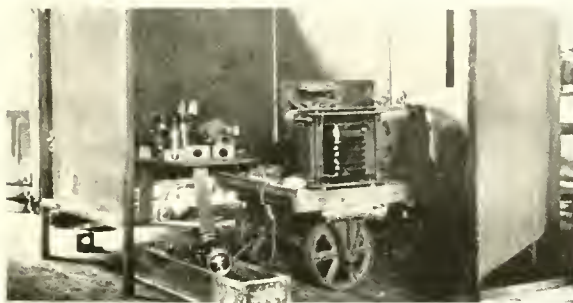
Lincoln Arc Welder in Rock Island R. R. shops, Silvis, Ill., showing the black canvas screen with which the Welder is surrounded, thus protecting the eyes of other workmen from glare.
